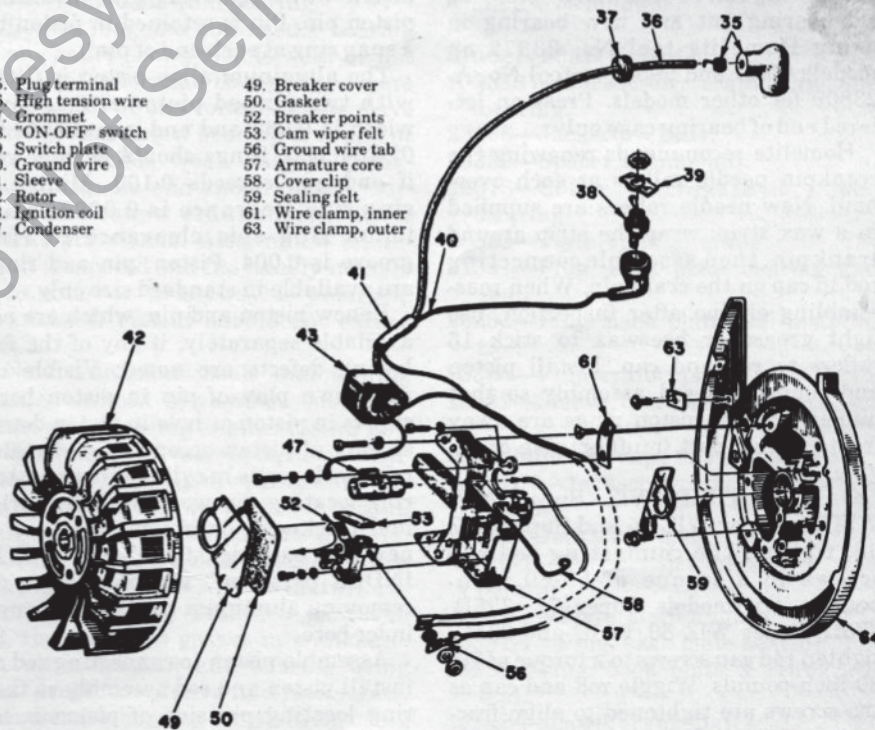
Exploded view of typical REPCO magneto used on all models. Rotor (flywheel) has three tapped holes for installation of remover (Homelite tool No. AA-22560). Magneto back plate (64) supports crankshaft seal and needle bearing.
